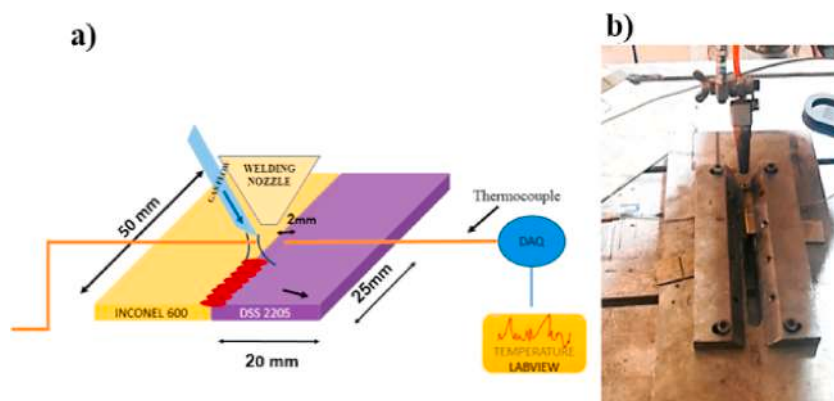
Laser welding experimental setup, a) schematic, b) actual view.
